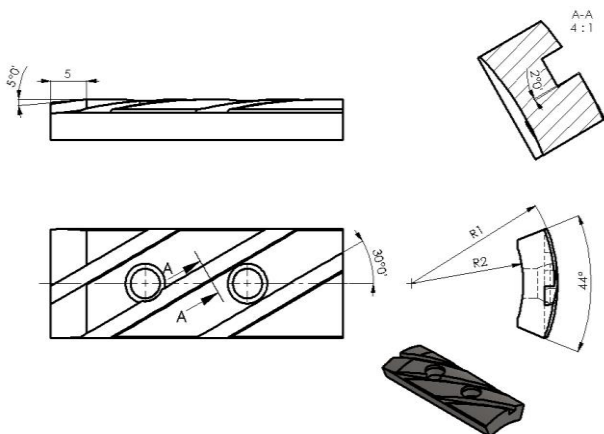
Cutting-smoothing guiding insert with inclination of the cutting edge  $30^\circ$
